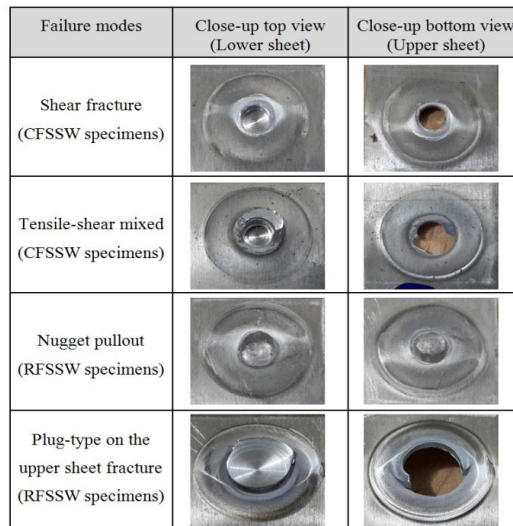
Close-up views of different modes of fracture under tensile-shear tests.
